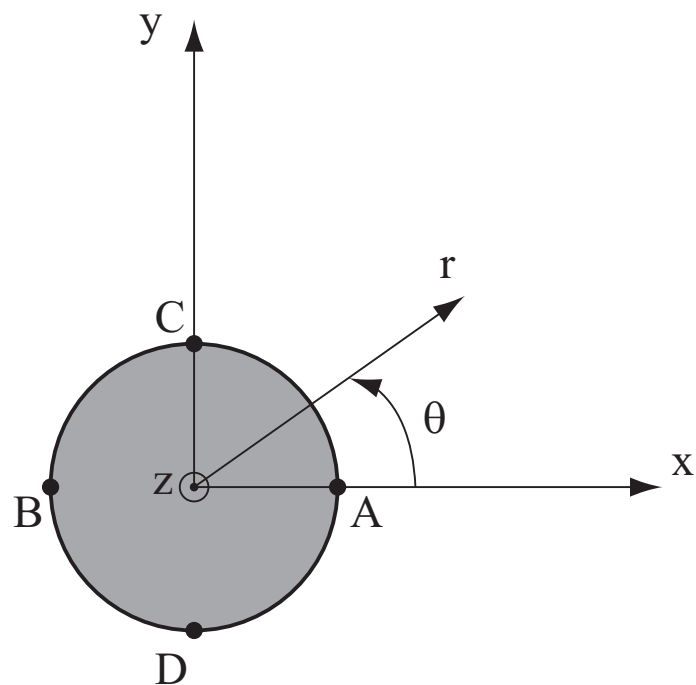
A schematic of a top view of the connection or spot weld (idealized as a rigid inclusion) in the upper plate of the specimen.
